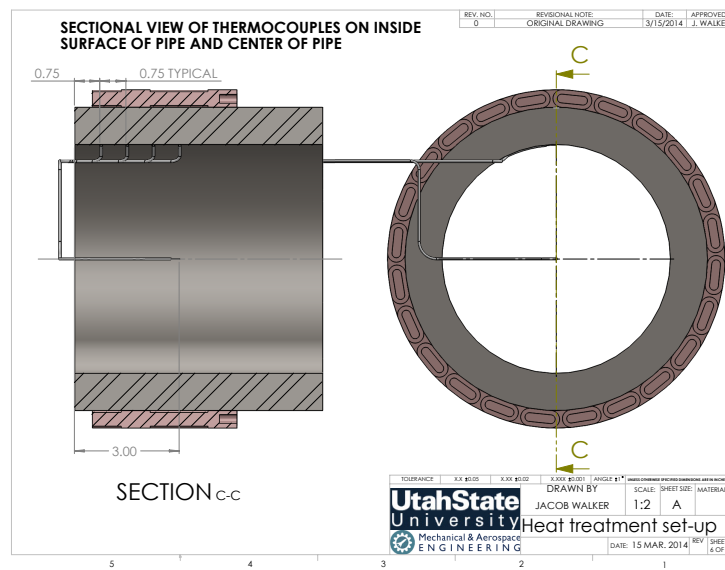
Drawings of Heat-Treatment Set-Up; Page 6
